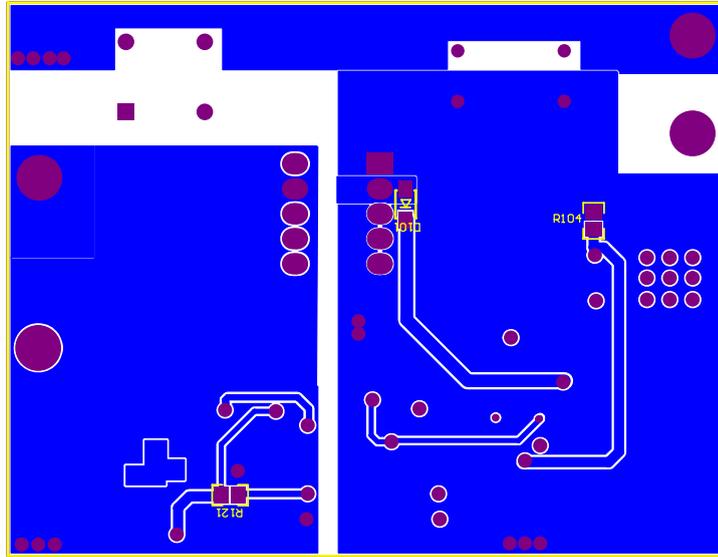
PCB Layout Bottom, as viewed from the bottom
